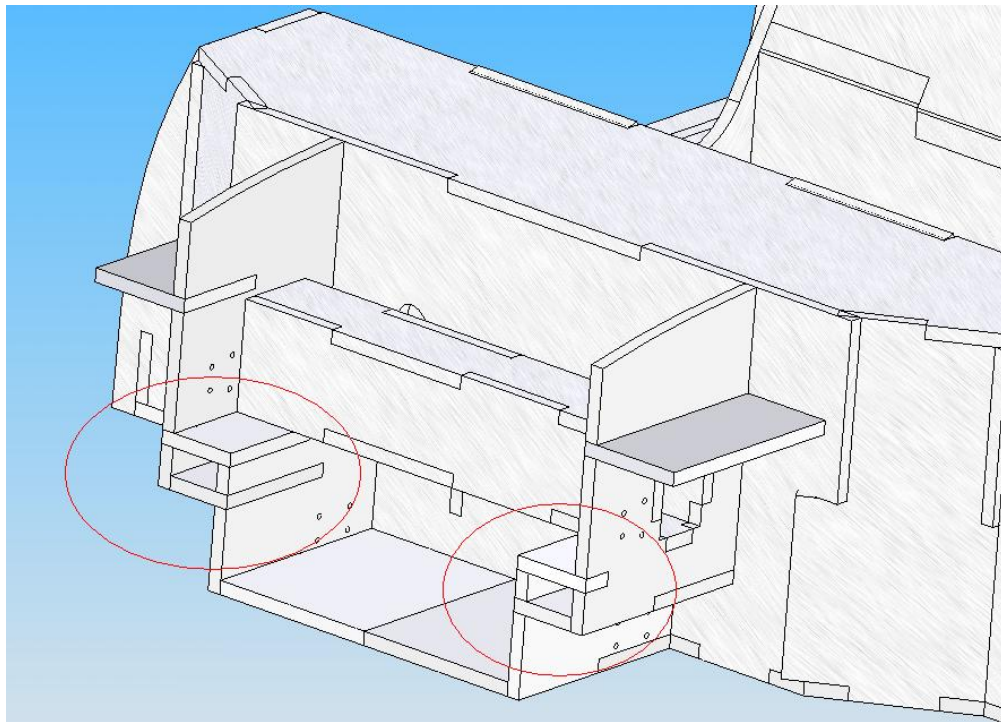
A sectioned view of the front of the Ultracommuter chassis showing the inbuilt frontal beams.
